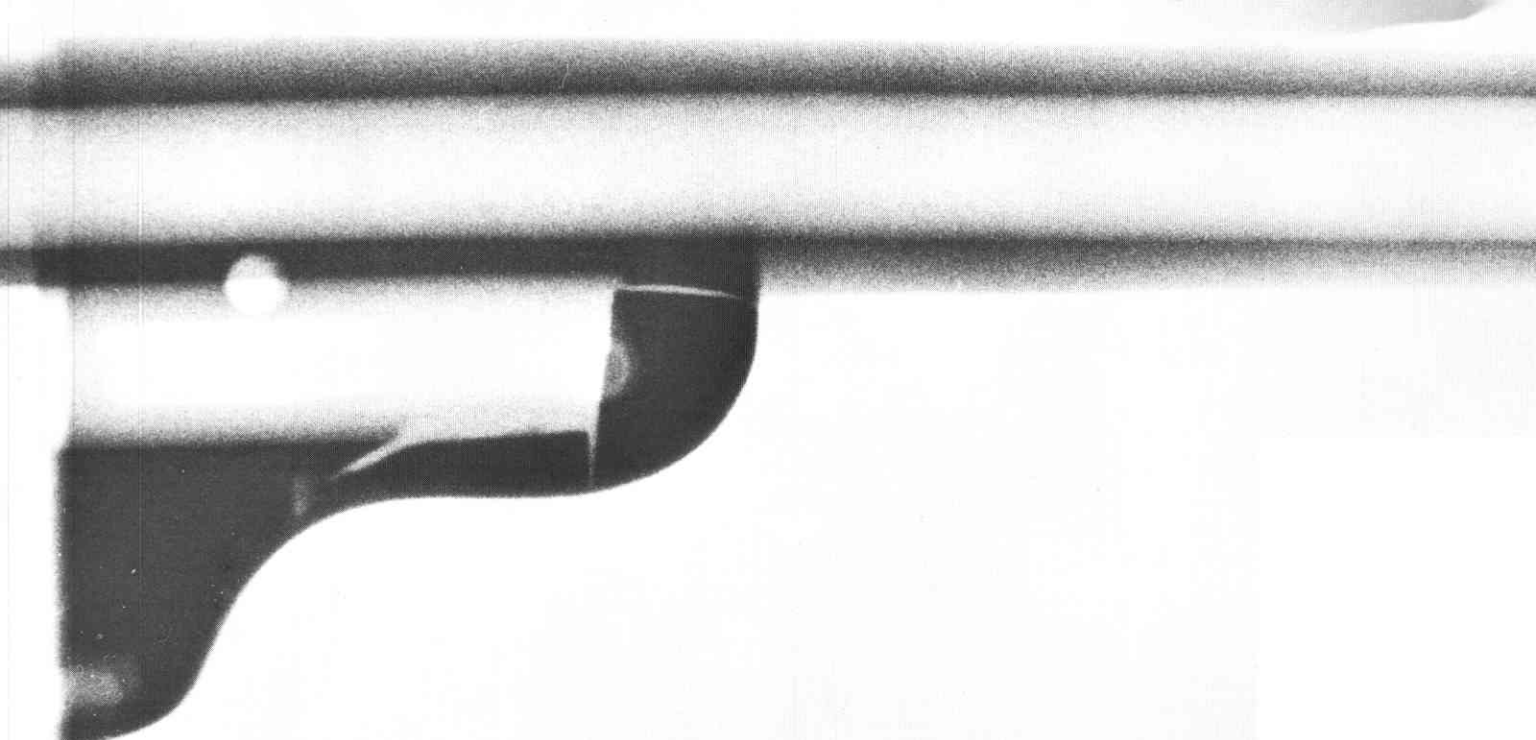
This is an X-ray photo of a steel plug welded into the packer hole of a common Colt Pocket Model to create the rarer "Wells Fargo."
